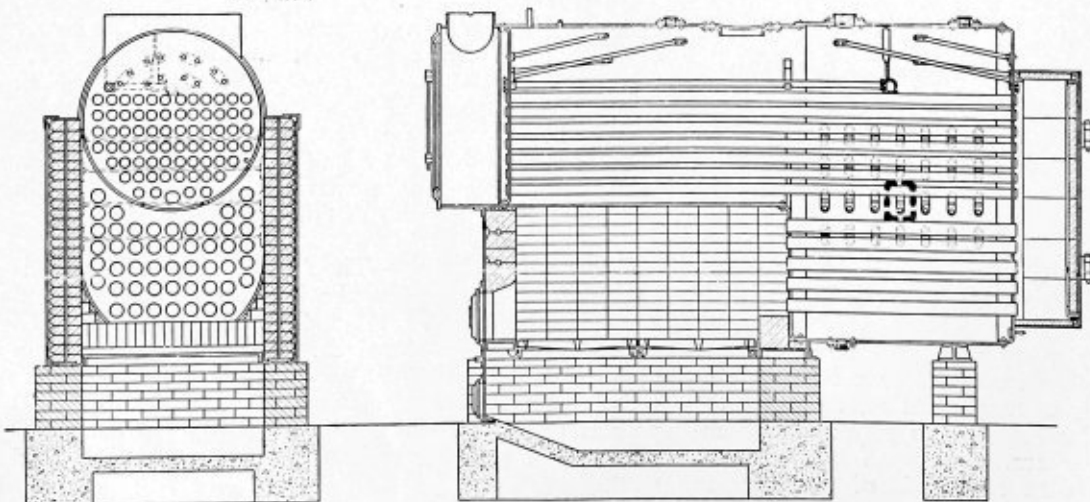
Sectional elevation showing method of bracing and staying pressure parts of economic boiler
